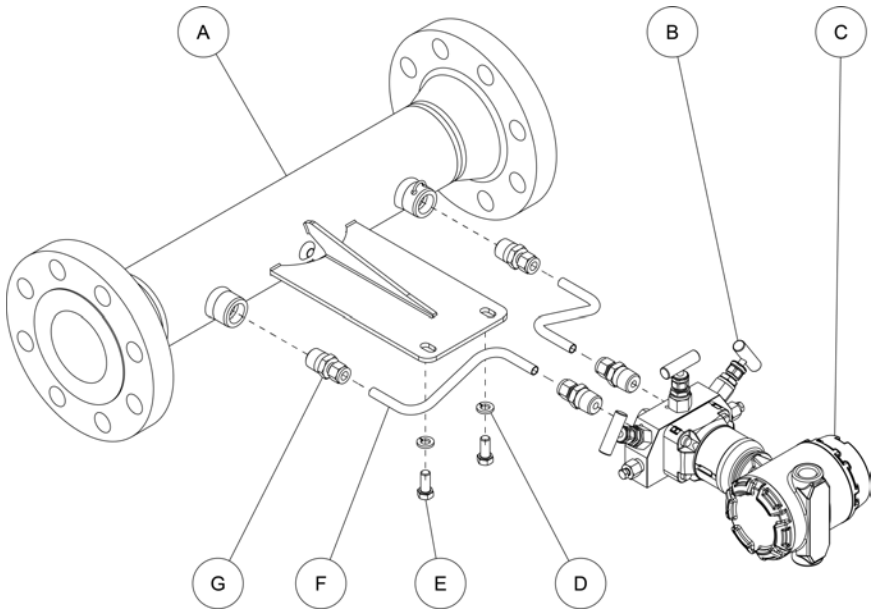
Exploded View 2: 2" NPS/DN50 Flanged Assembly
